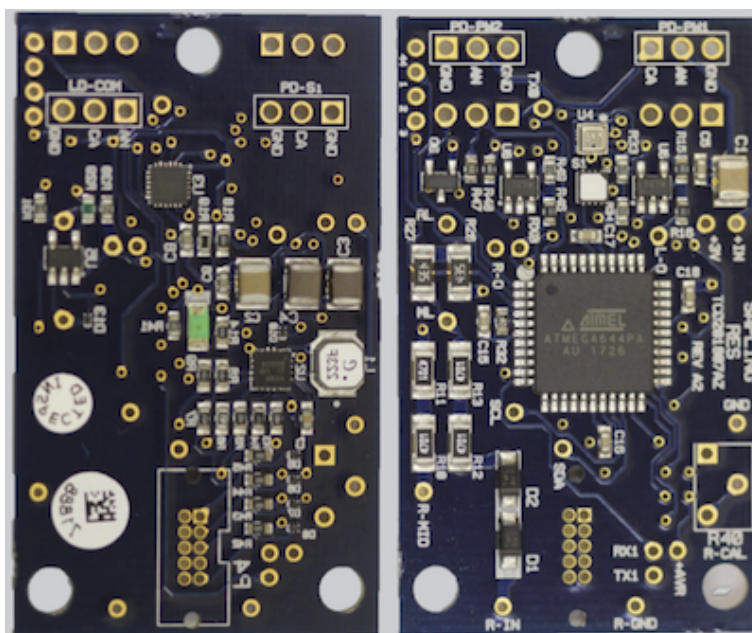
Photograph of revised optically powered electronics PCB. Left photograph shows the PCB underside and is flipped to provide alignment with the right photograph, the PCB top.
